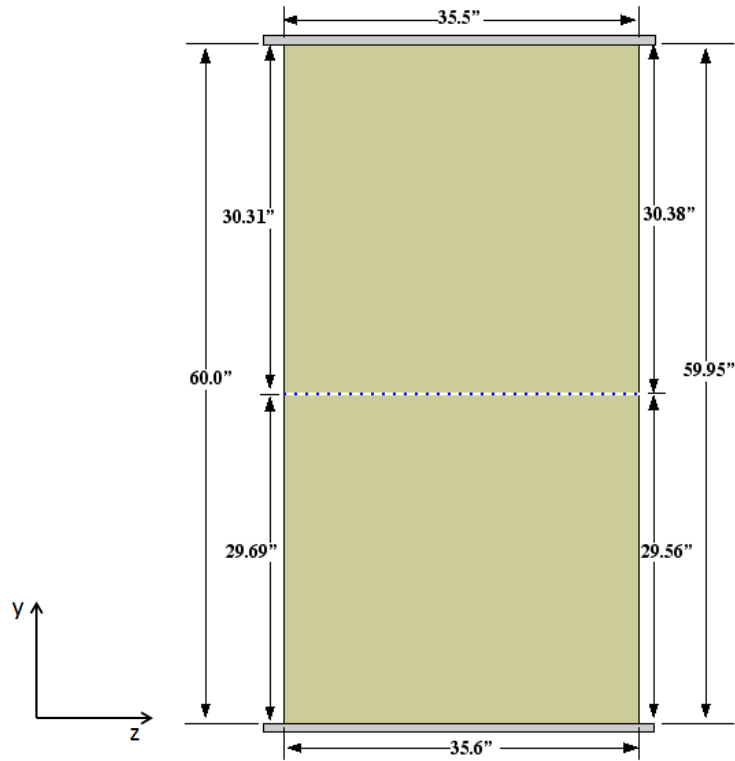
Potted specimen dimensions. Note that the outside surfaces of the Al end plates were machined flat and parallel. The position of the core splice is also shown relative to the inside surface of the Al end plates.
